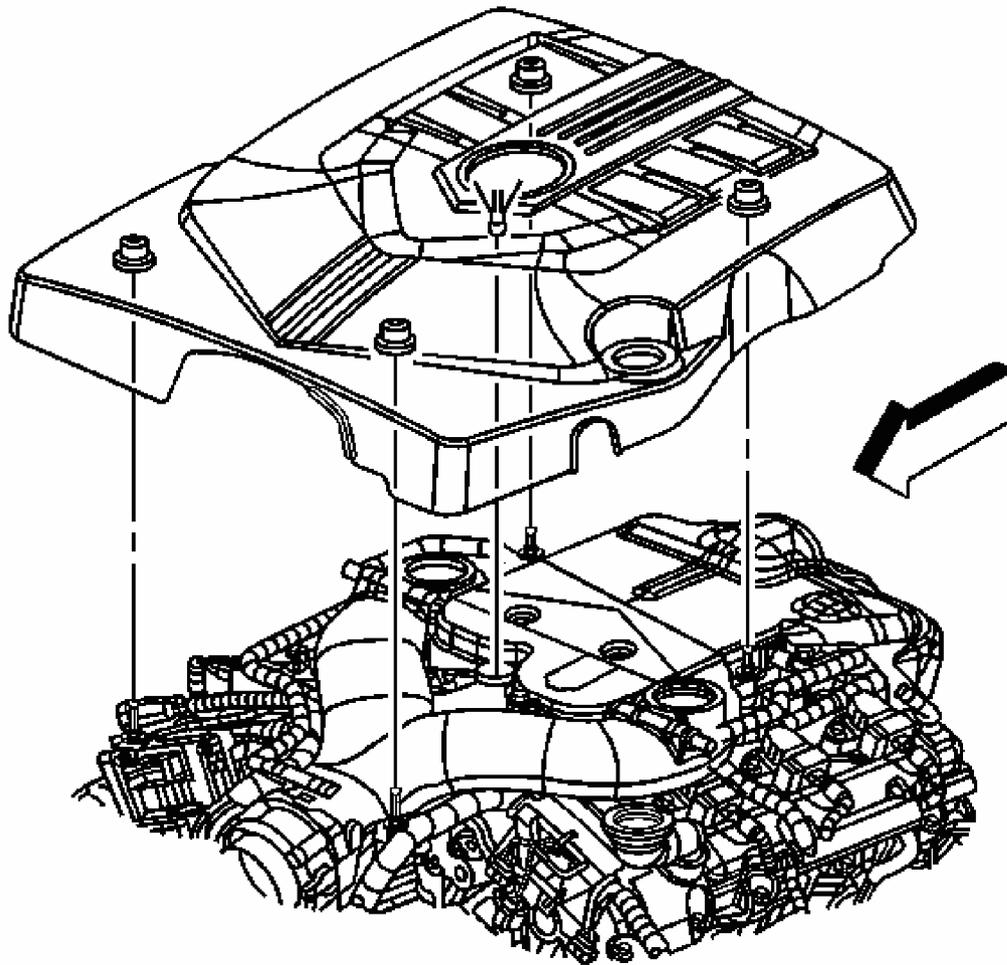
Removing & Installing Engine Cover/Sight Shield
